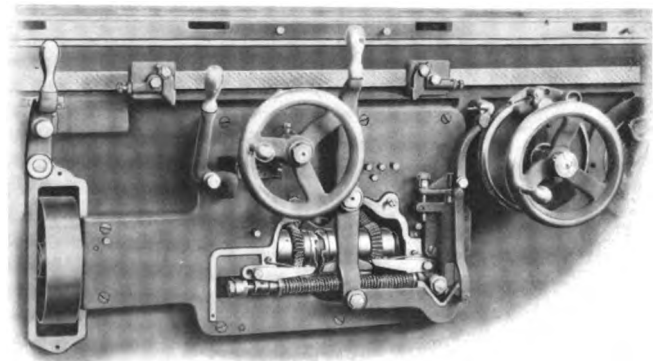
Automatic Cross Feed, Table Drive and Reversing Mechanism
